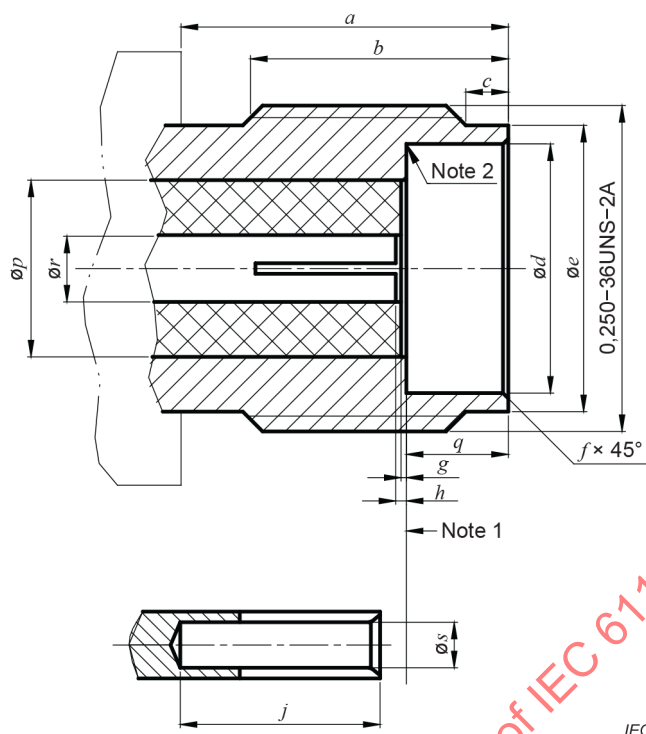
Connector with pin centre contact (for dimensions, see Table 1)
